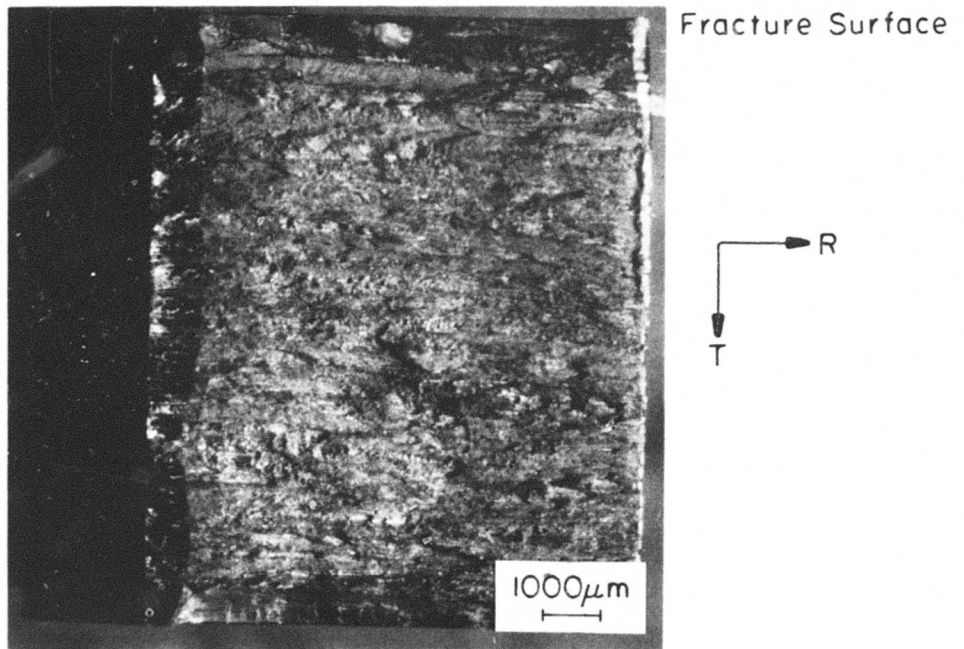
Alloy 334, sample 4WRH1. Fracture surface X8, crack path X500.
